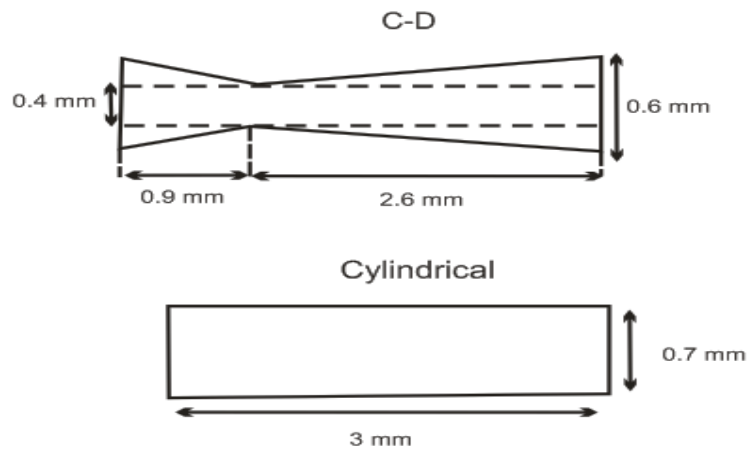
The C-D and cylindrical choked gas die internal profile dimensions.
